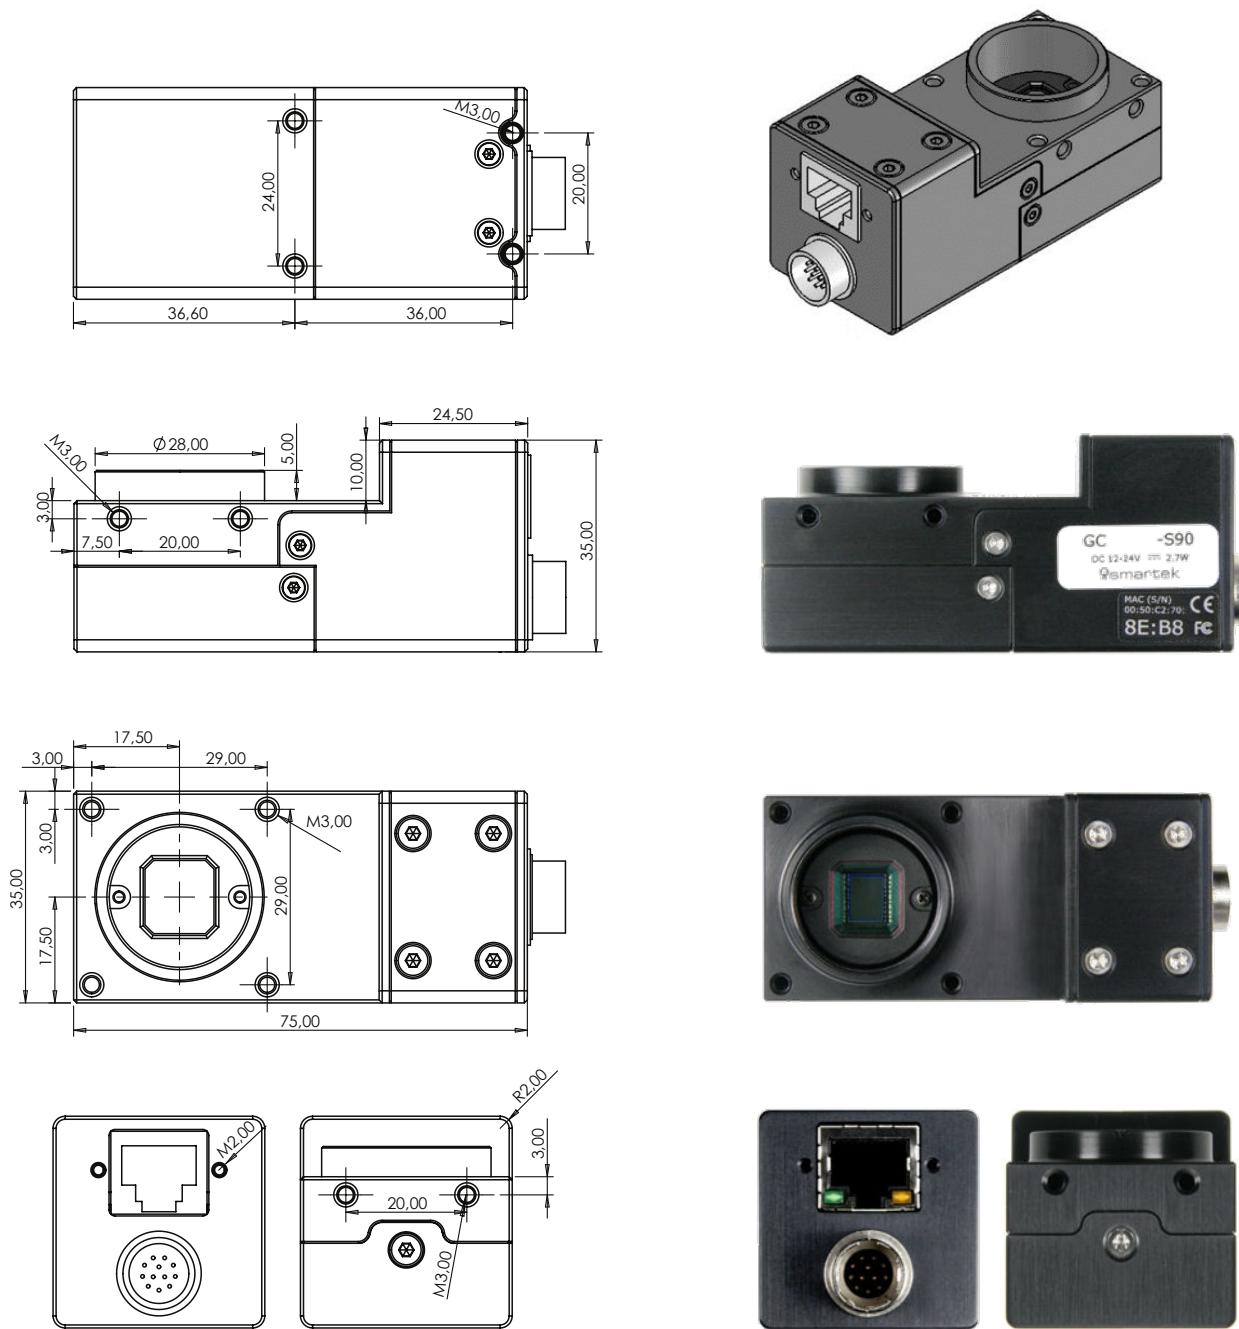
Technical measures of angled 90° camera housing (all dimensions are in mm [inch])
